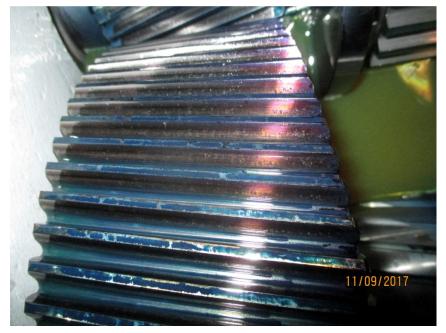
South Span Drive Reducer Auxiliary Gears. The reducer gear teeth have minor damage that may be from particles passing through the mesh.
